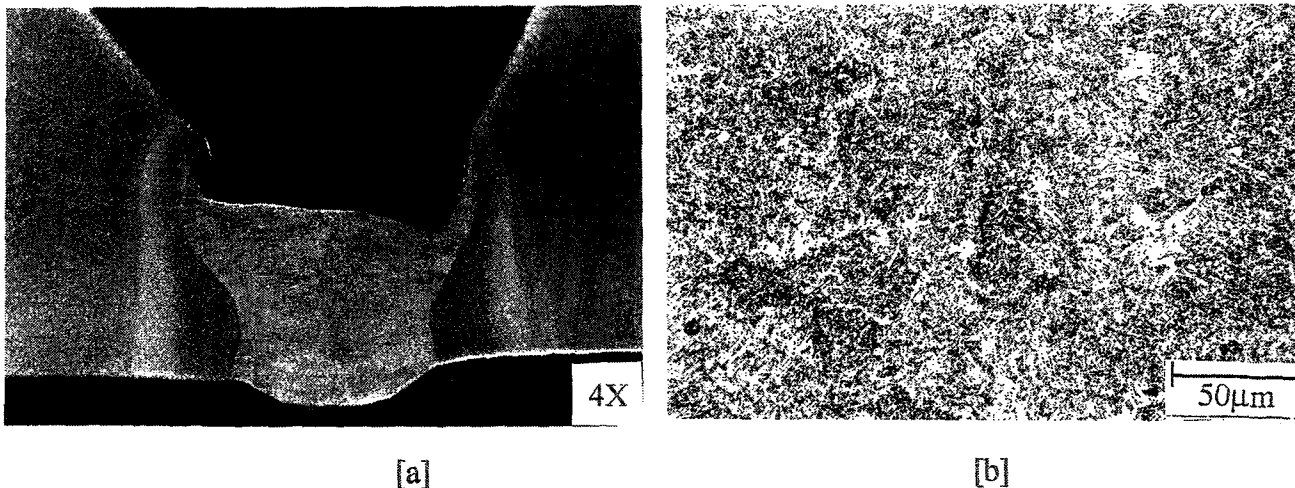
Analysis of hot crack propagation in the weld deposited with electrode A. (a) Macrophotograph and (b) Enlarged view of the crack.
